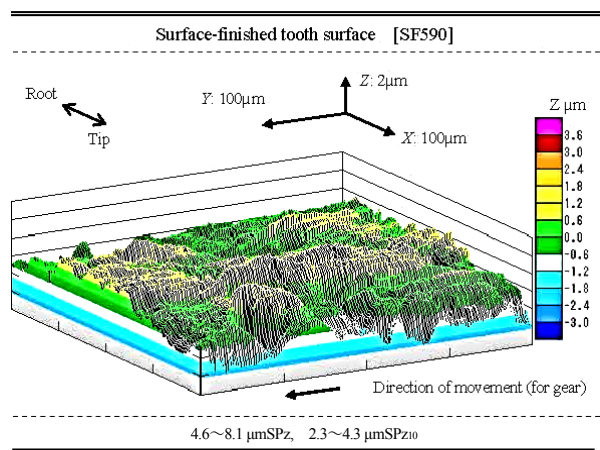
Bird's eye views and three dimensional profile parameters of the test tooth surface ( $m=2.5$ ,  $Z=32$ ,  $\alpha_0=20^\circ$ , spur gear)
